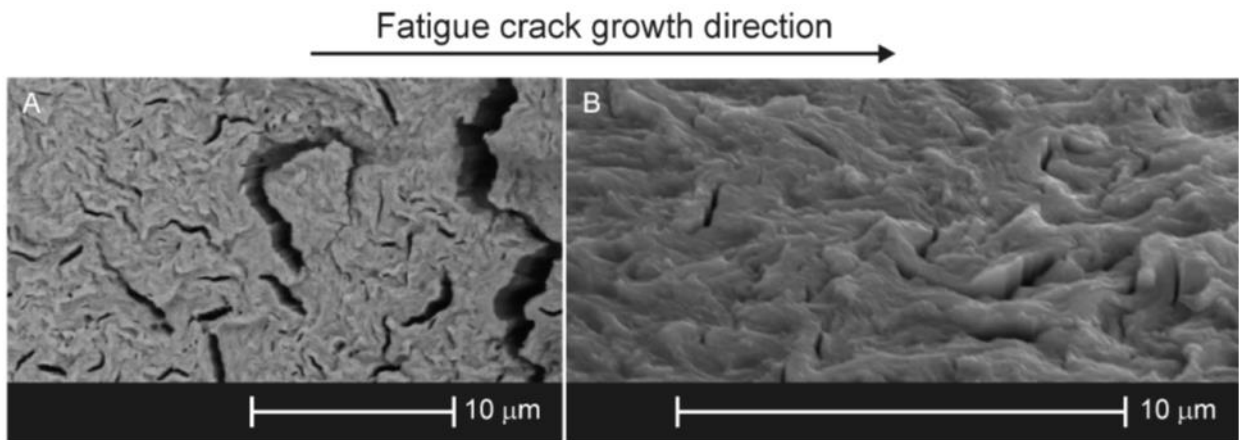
Fatigue Fracture Surface with Secondary Cracks
